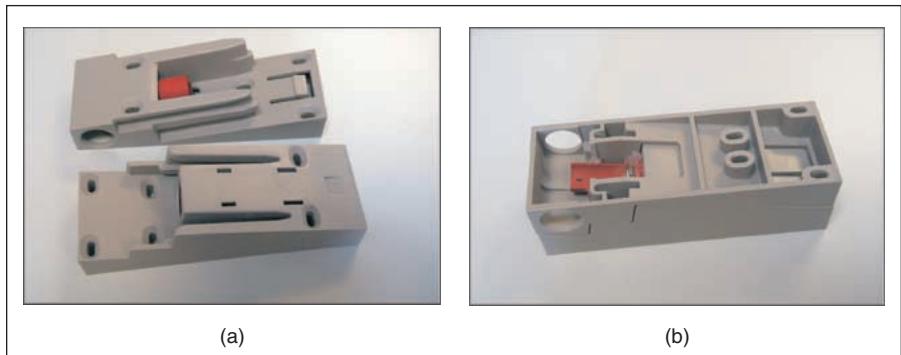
Water pipes and wiring connector (a) disassembled and (b) assembled views.
